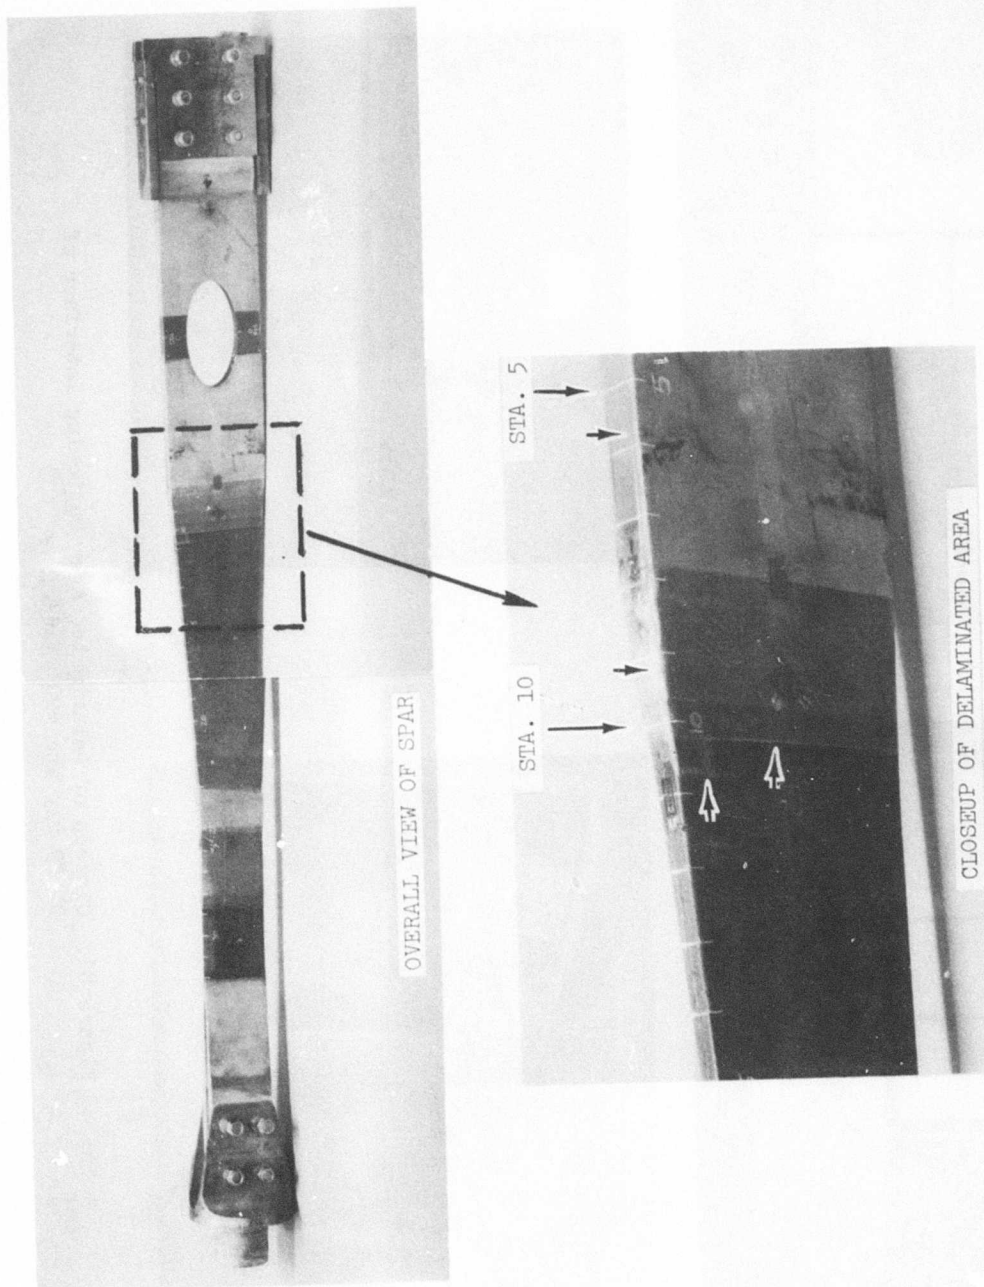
Fatigue Crack Indication in Root End Fatigue Test Specimen, S/N 7.
